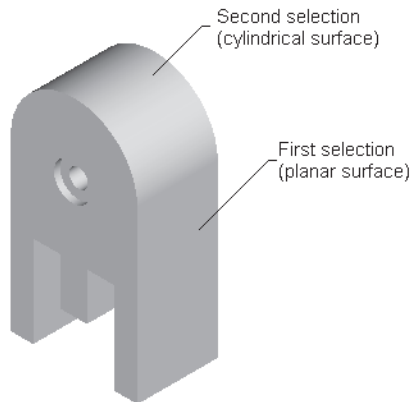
Selecting a planar surface and a cylindrical surface to create a datum plane
